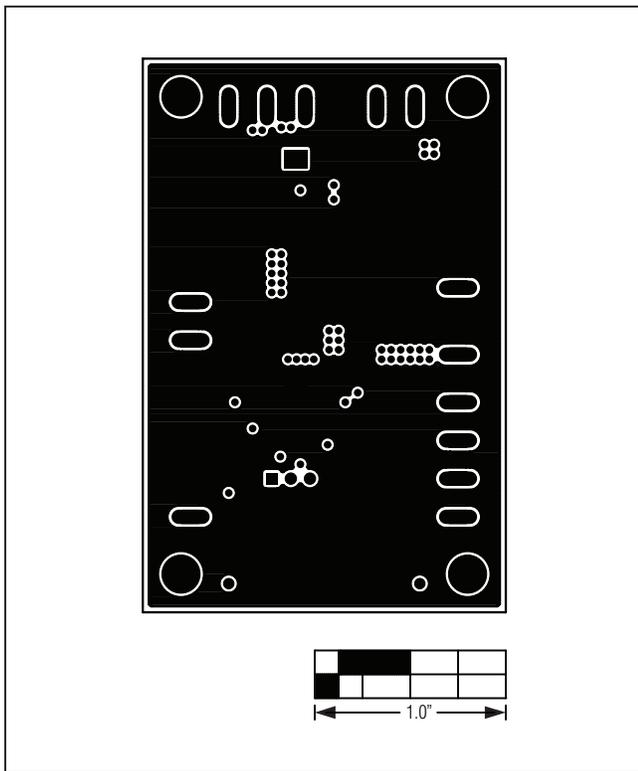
MAX17512 EV Kit PCB Layout—Layer 2
